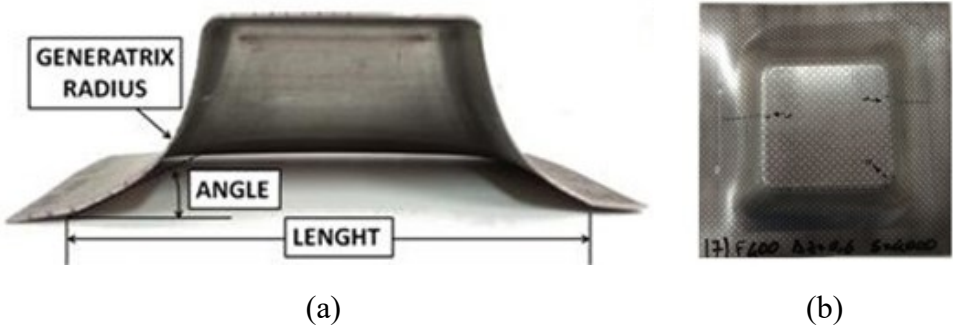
(a) Section of the part geometry; (b) Formed part.
